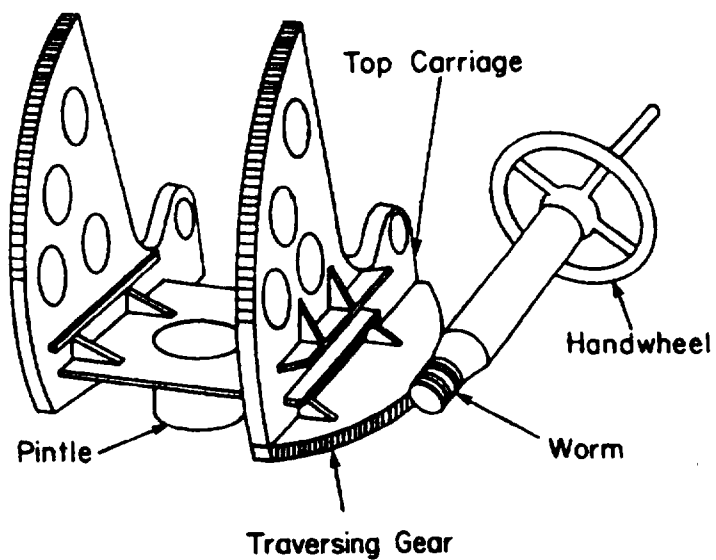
Traversing Mechanism With Gear on Top Carriage
